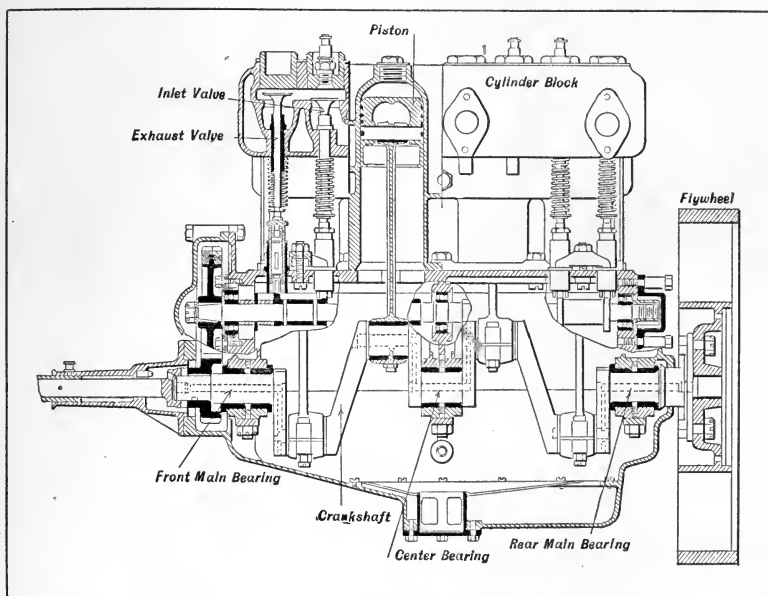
Section Through Typical Four-Cylinder Block Motor with Three-Bearing Crank Shaft.
